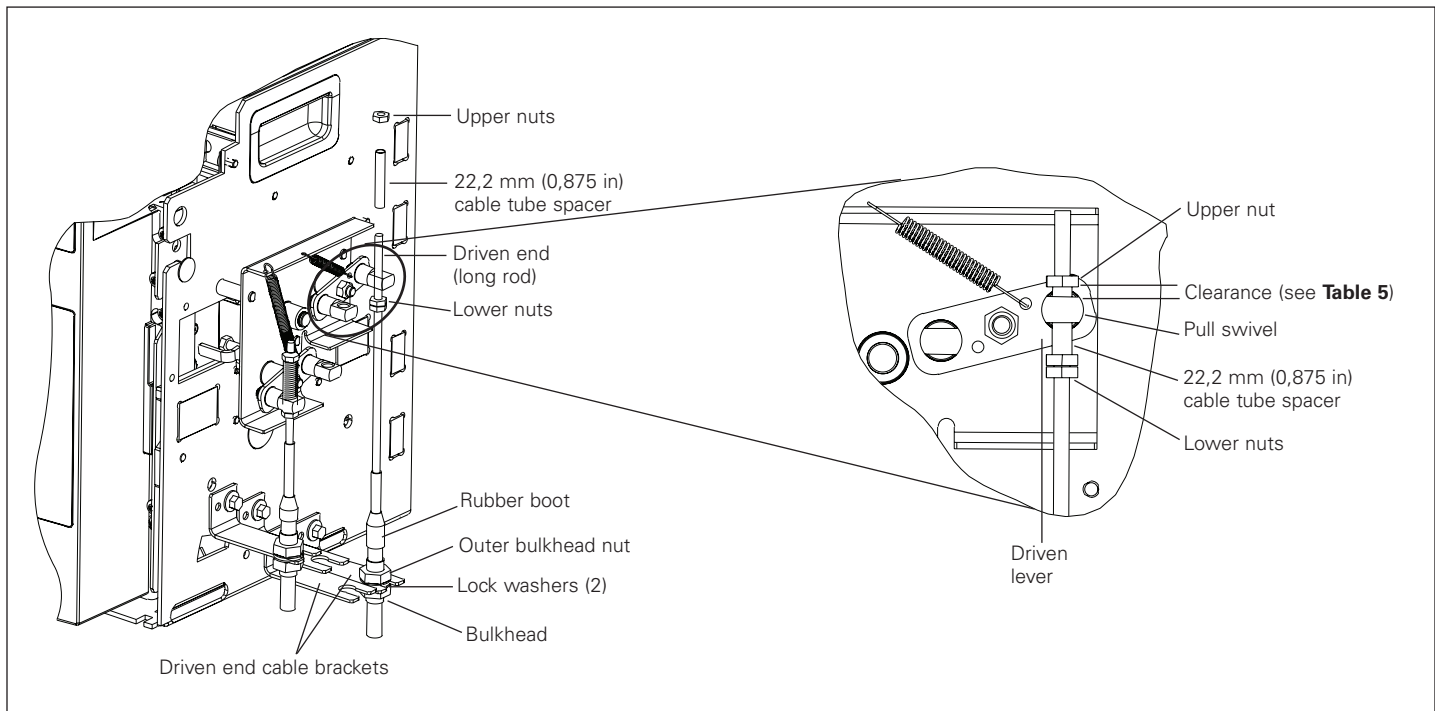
Details for Step 7: driven (long rod) end mounting component identification and Step 8 driven (long rod) end after adjustments
